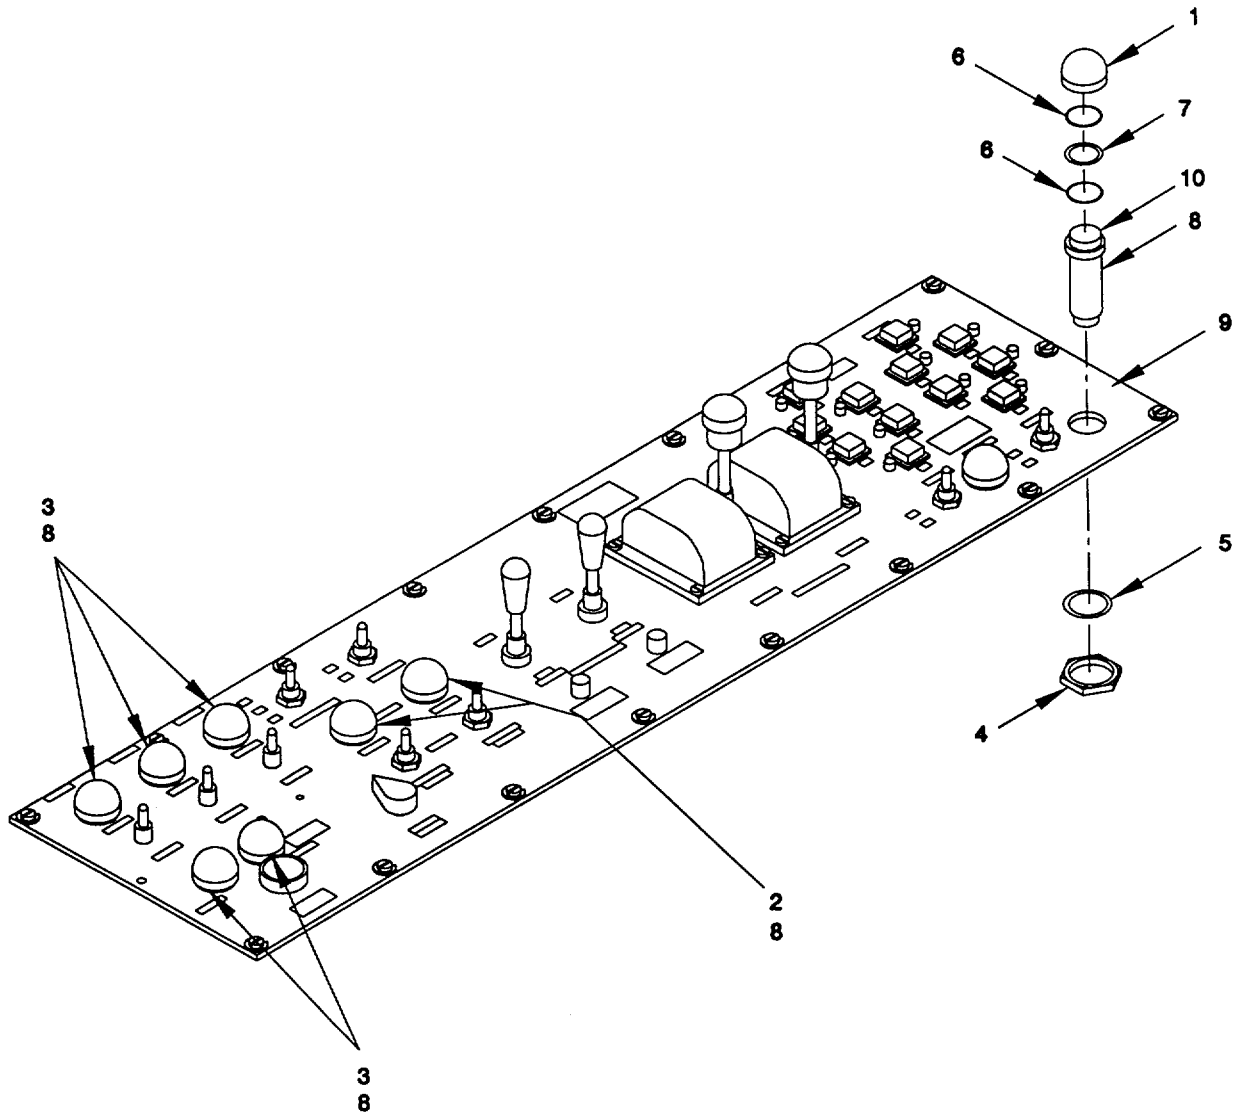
Indicators, Lower Control Panel "A2", Remove/Install.
